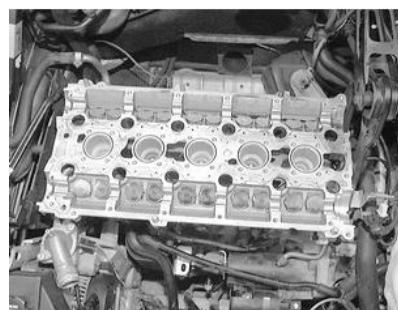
Tighten the cylinder head bolts in proper sequence to specification using a torque wrench
